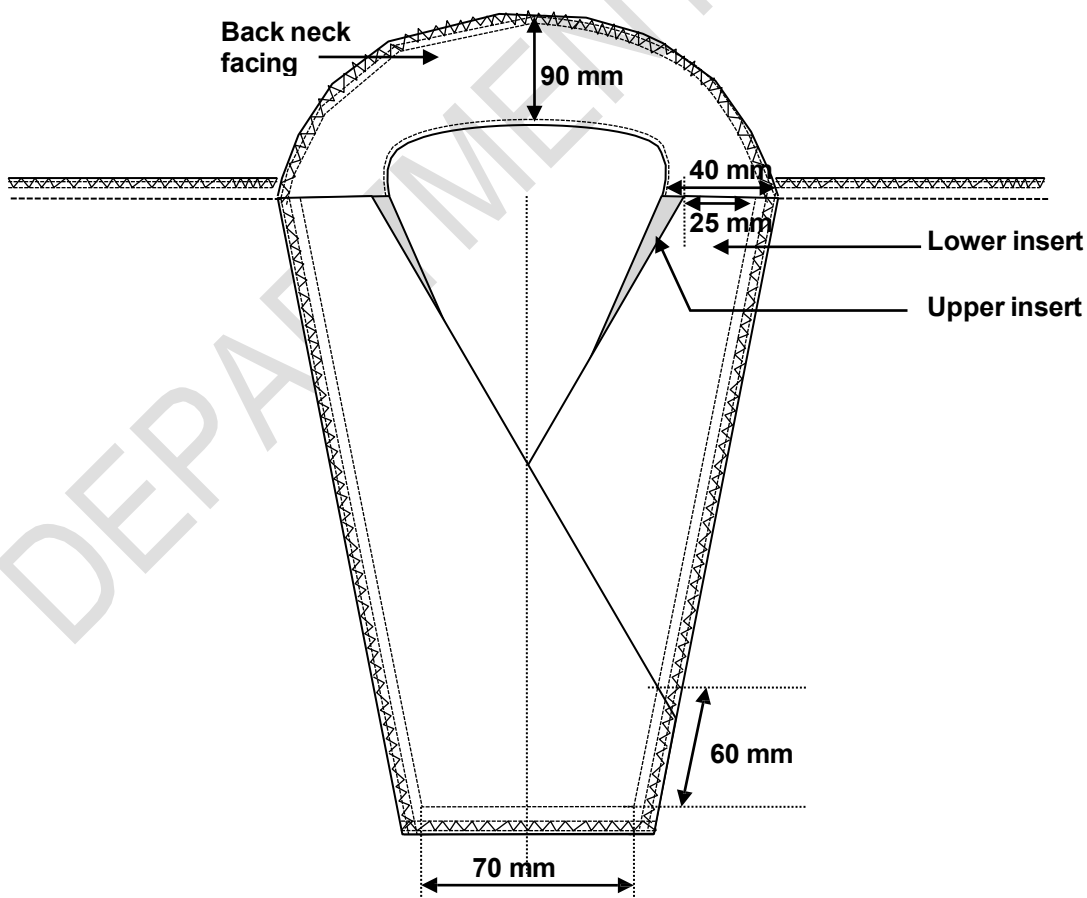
Inside view of neck opening with finished dimensions of the lower inserts and back neck facing
